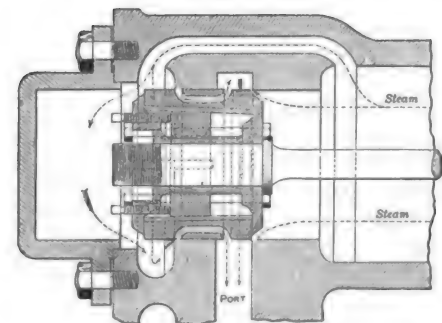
"EXPANSIBLE" PISTON VALVE.
